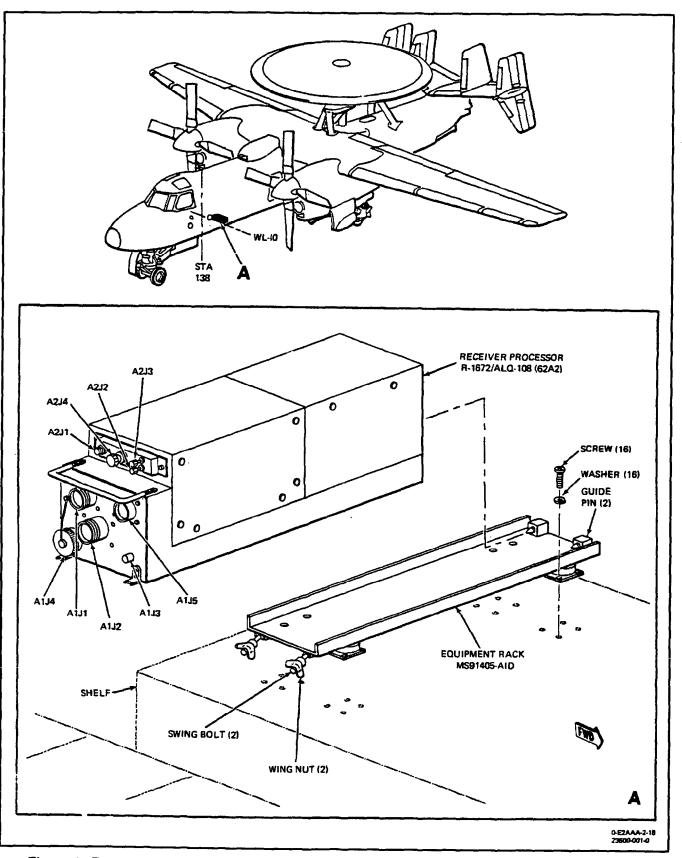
Removal and Installation of Receiver Processor R-1672/ALQ-108 and Equipment Rack MS91405-AID
